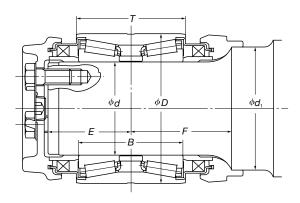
Sealed-Clean Rotating End Cap Tapered Roller Bearings
